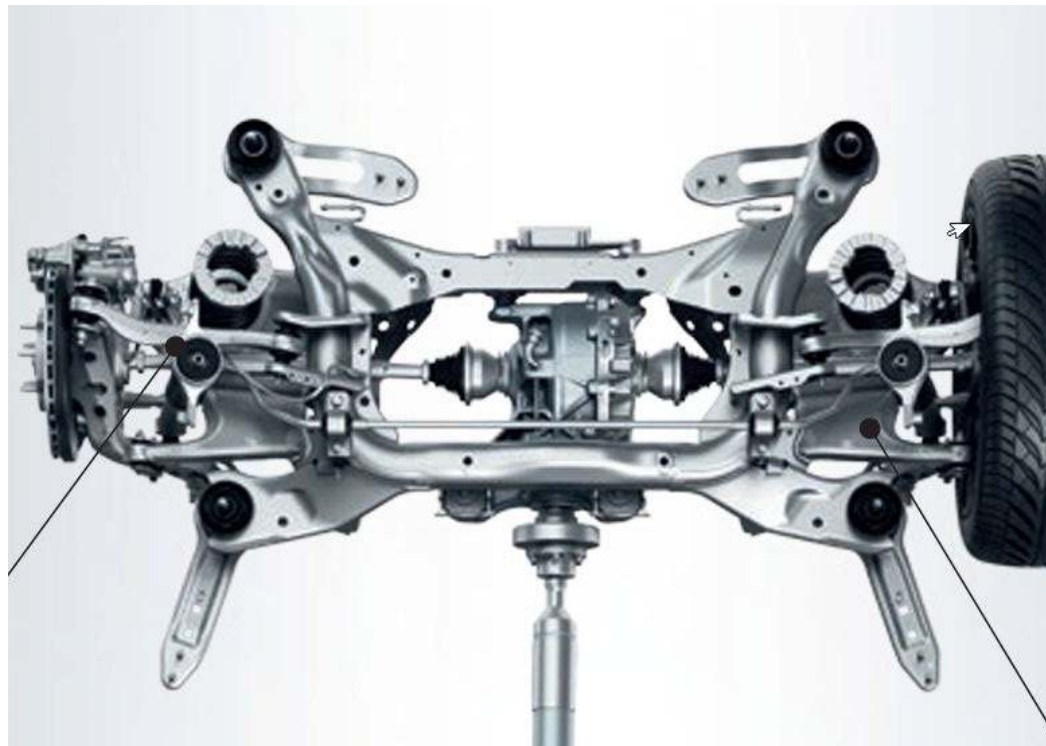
Top down view of XE/XF V6 rear suspension assembly with highlights, fuel tanks not shown.
